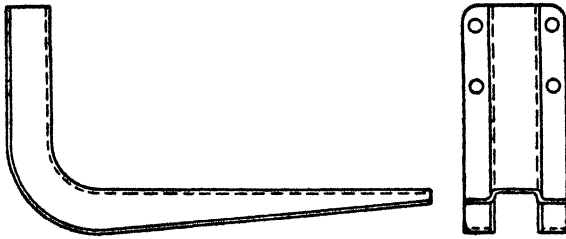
TRUCK-TYPE PRESSED-STEEL STEP HANGER.
